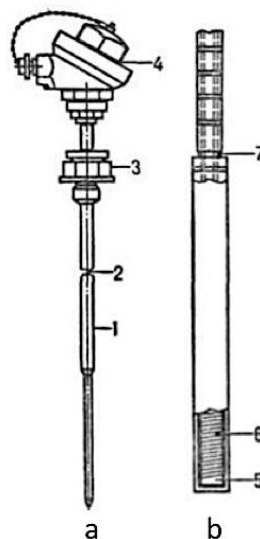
Resistance thermometers: a – general view; b – a sensitive element; 1 – a metal carrying case; 2 – thermocouples; 3 – a pipe connection mounting; 4 – a head for connection to the secondary device; 5 – a micaceous carcass; 6 – winding of platinum wire; 7 – leads.
